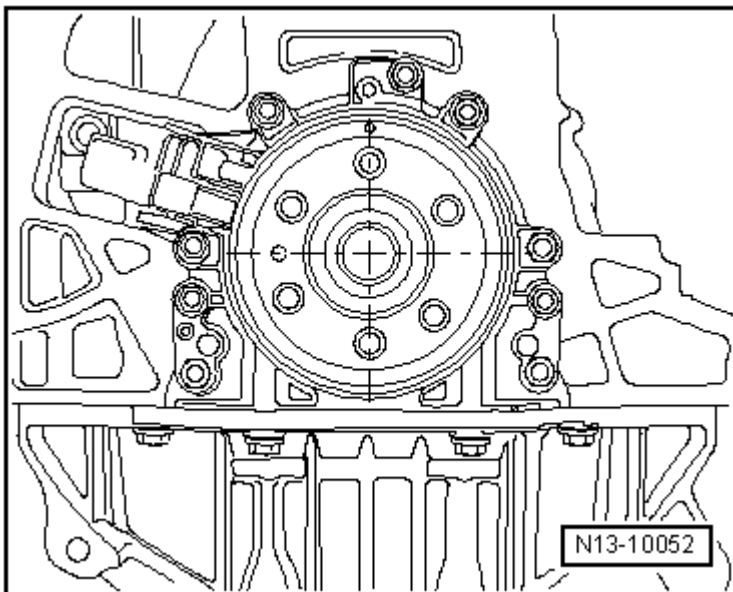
Identifying Crankshaft Rotated To Top Dead Center (TDC) For Cylinder 1
